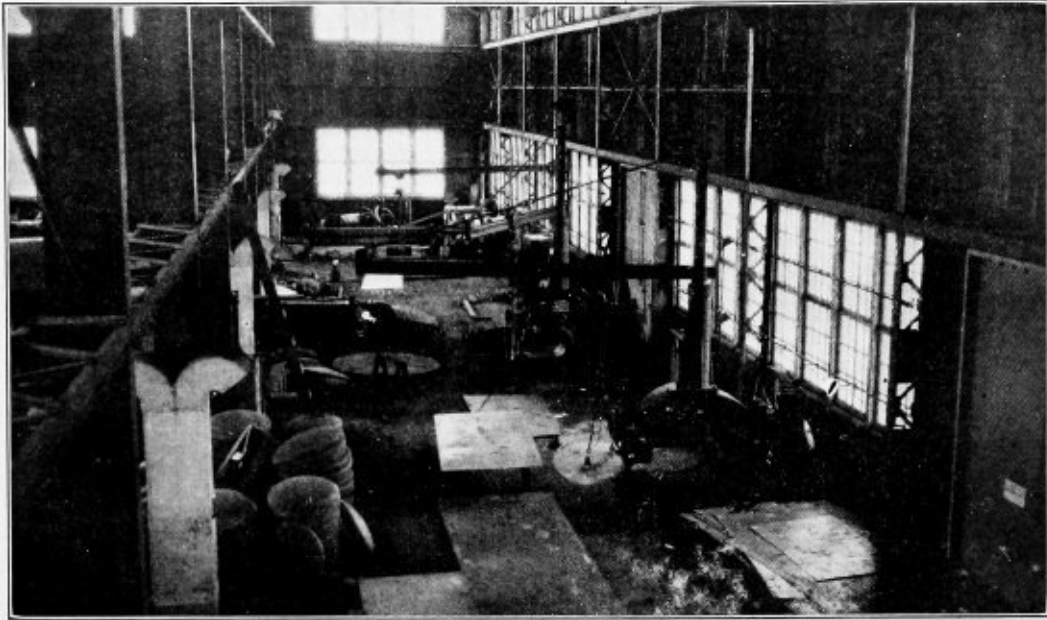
30-FOOT BAY IN MAIN SHOP
